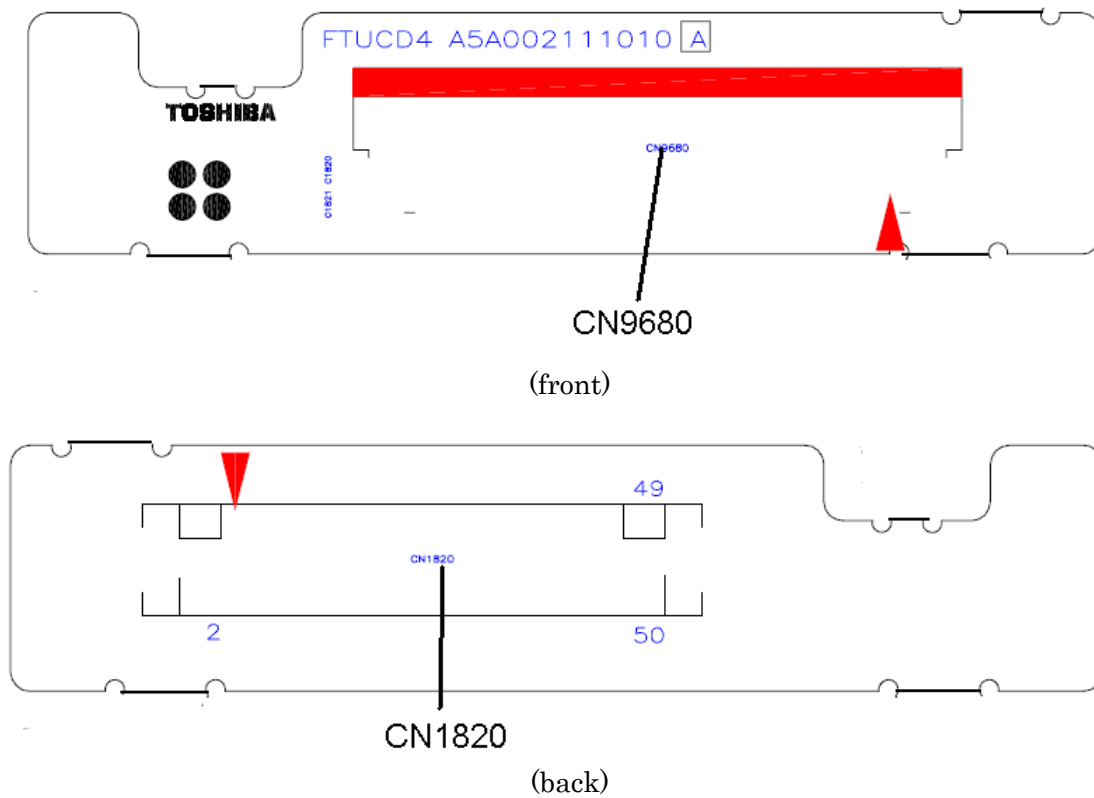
ODD board (FTUCD\*) layout (front/back)
